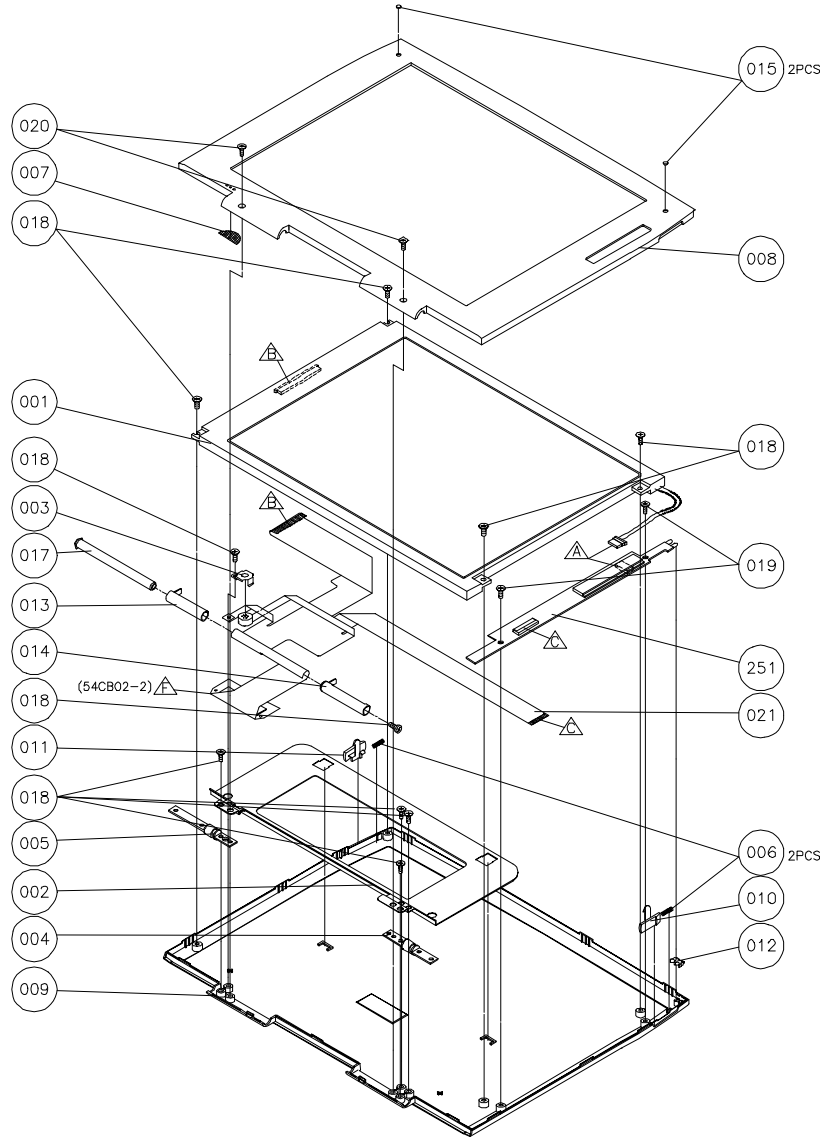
LCD Assembly IPB for GS/GO Panel
